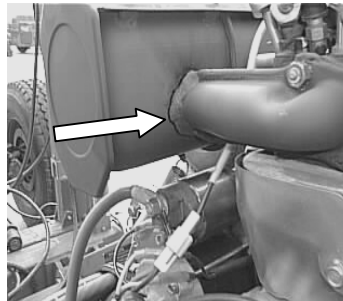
Note the Crack at the Weld Joint
